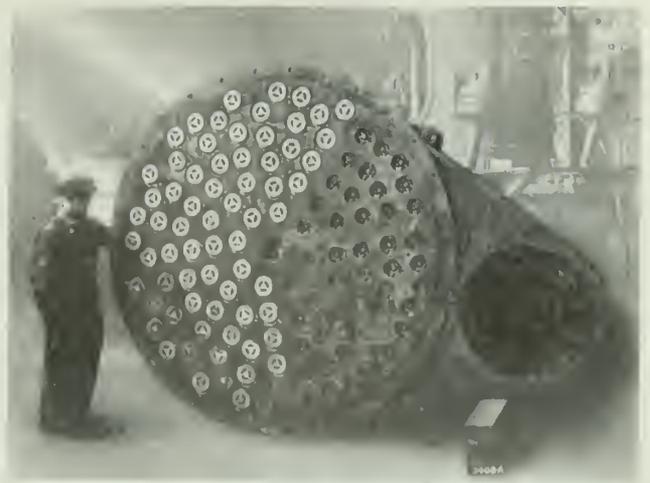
ILLUSTRATING METHOD OF INSTALLING PLATE VALVES IN PLACE OF EXISTING VALVES IN THE HEAD.
